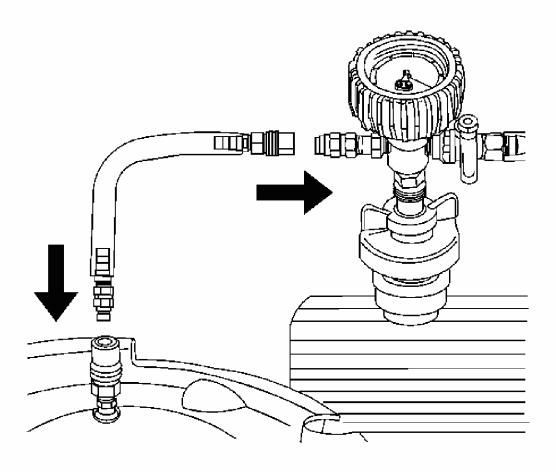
Attaching Vacuum Hose To Vacuum Gauge Assembly & Vacuum Tank Courtesy of GENERAL MOTORS CORP.
